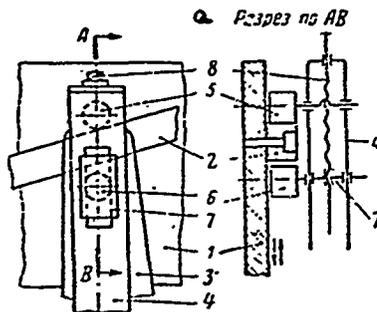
Copier roller regulating mechanism of rifling machine (see Fig. 123)
